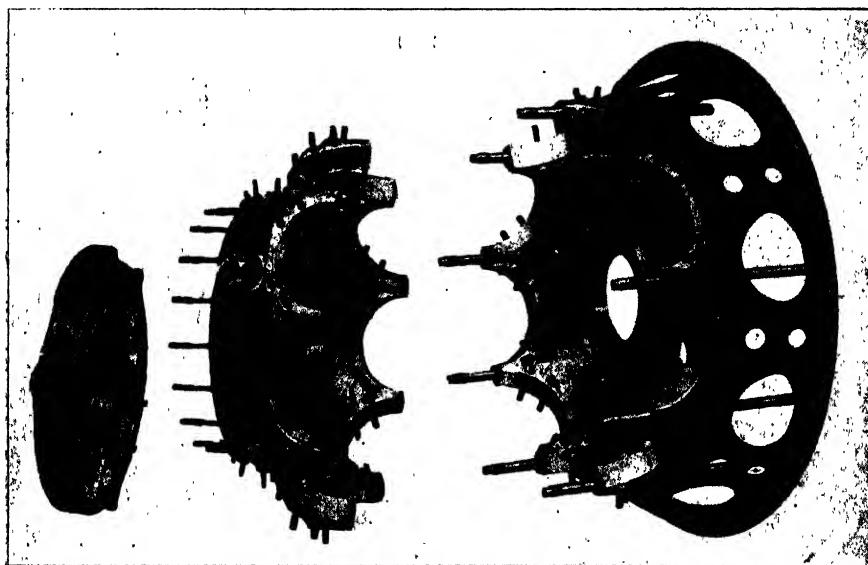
Crankcase—Front Half with Front Cover, and Rear Half with Cone Mounting.
